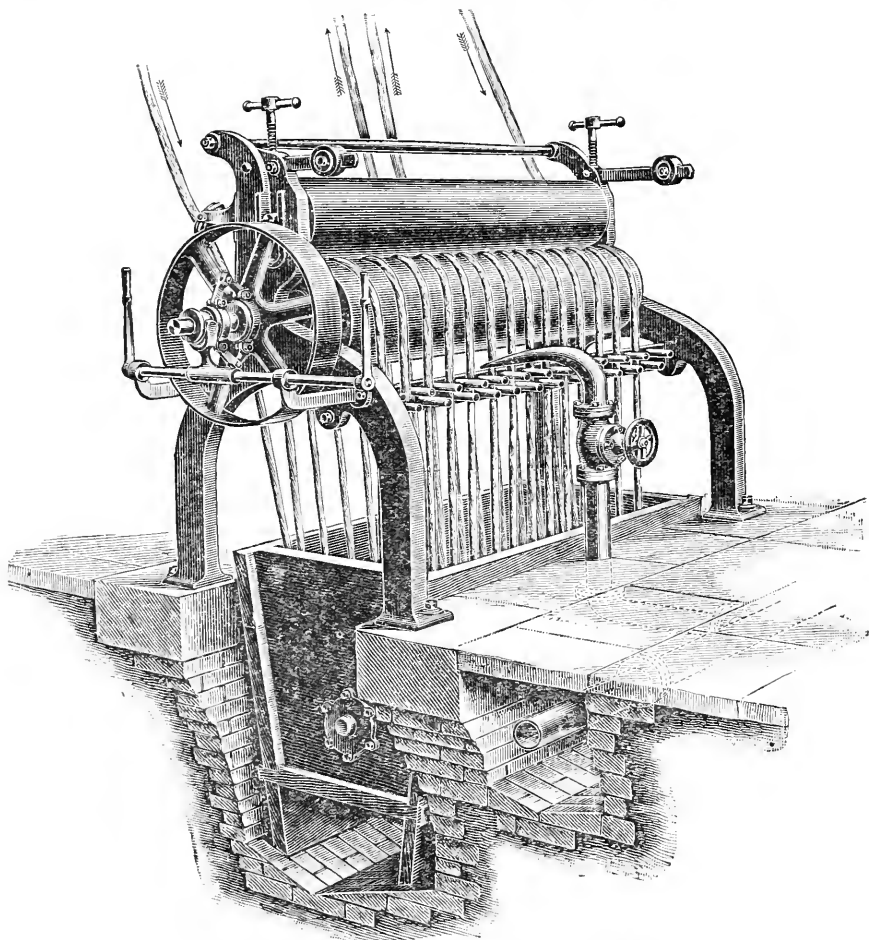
Washing machine for pieces in rope form (Mather & Platt).
